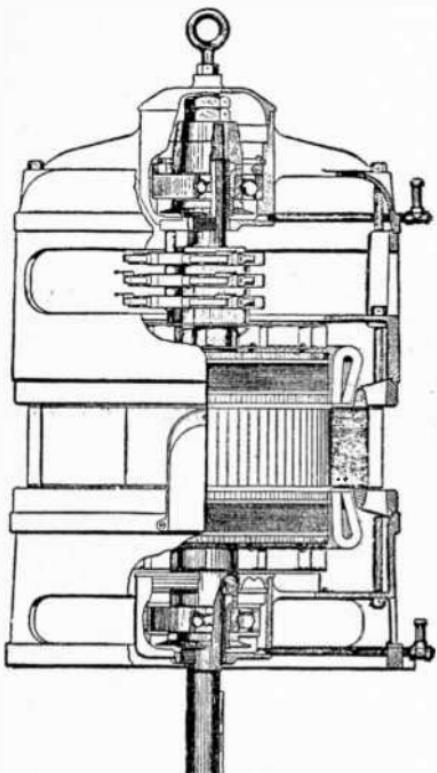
,813.—Allis Chalmers vertical slip ring motor. *It is provided with ball bearings having a combined radial and thrust bearing at the top and a radial bearing at the bottom. This arrangement is used for motors where the shaft extends downward. If the shaft extension be upward, the thrust is taken at the bottom of the machine. A sleeve is fastened in the bottom of each bearing and extends upward considerably above the level of the oil. The bearing is mounted on another sleeve fastened to the shaft, this fastening being above the stationary sleeve. The construction is such as causes circulation of the oil and a continuous flow thereof to the wearing surface of the bearing at all times. The bearings are supplied with suitable oil level indicators, and means for readily filling the bearings with fresh oil.
